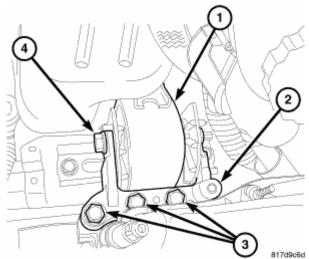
RIGHT ENGINE MOUNT Courtesy of CHRYSLER LLC
